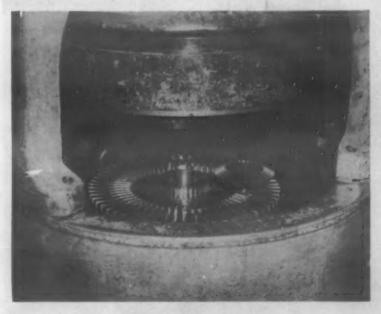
Quenching die and the bevel gear for which it is used in a quenching press.
